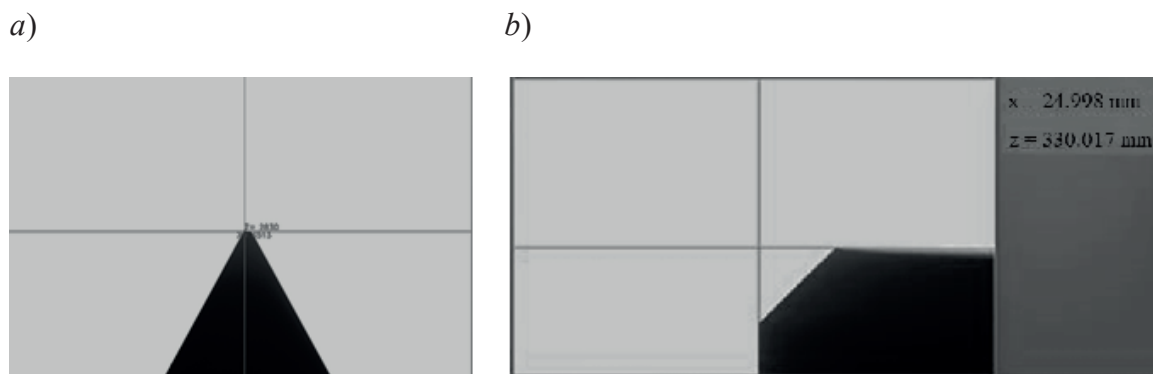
Example of user interfaces for calibration (*a*) and measurement (*b*) of size of cutting edge contour; A cone was used as a template.
